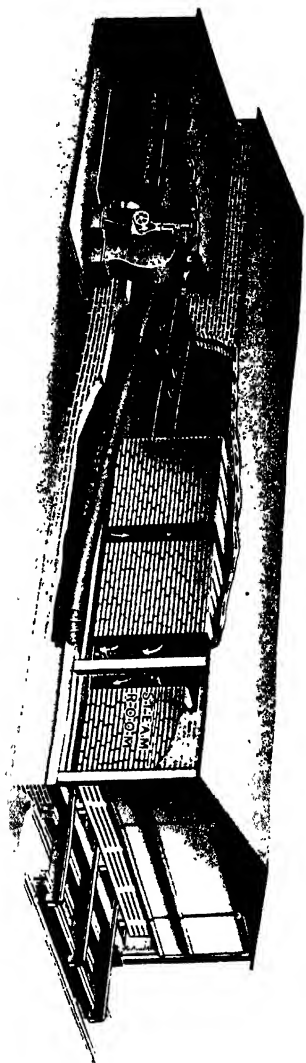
Type of forced draught dry kiln. (Courtesy of B. F. Sturtevant Co.)
